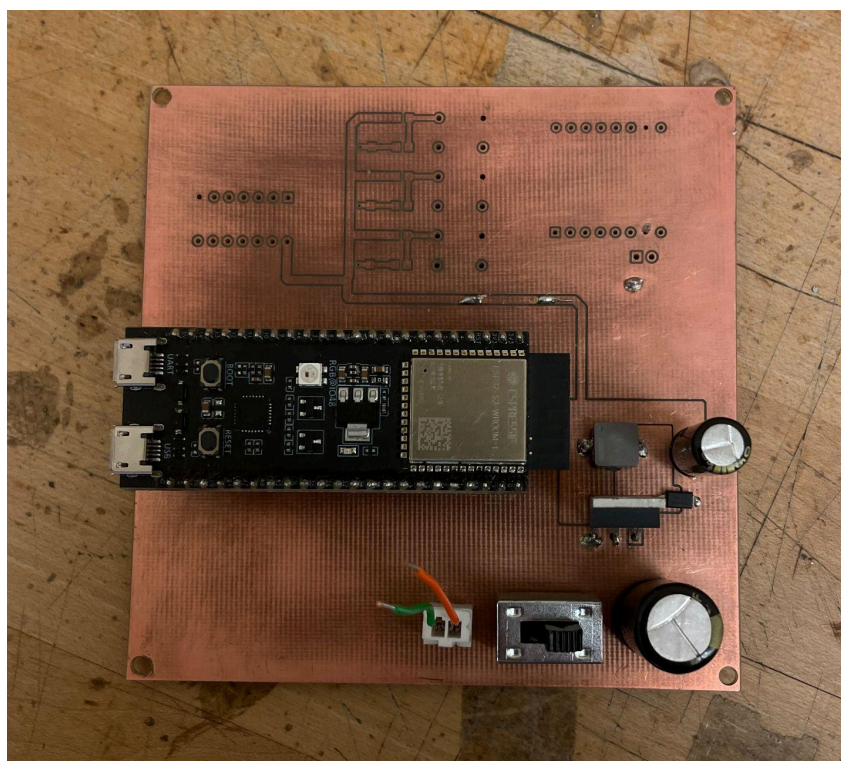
a: First Prototype Board with Buck Converter Circuit and Microcontroller Installed.
